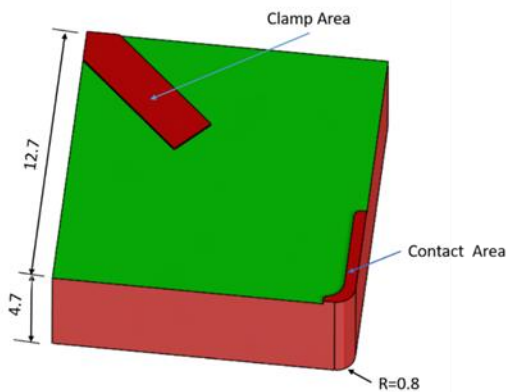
Dimensions of the insert and contact area between the inset and the workpiece.
